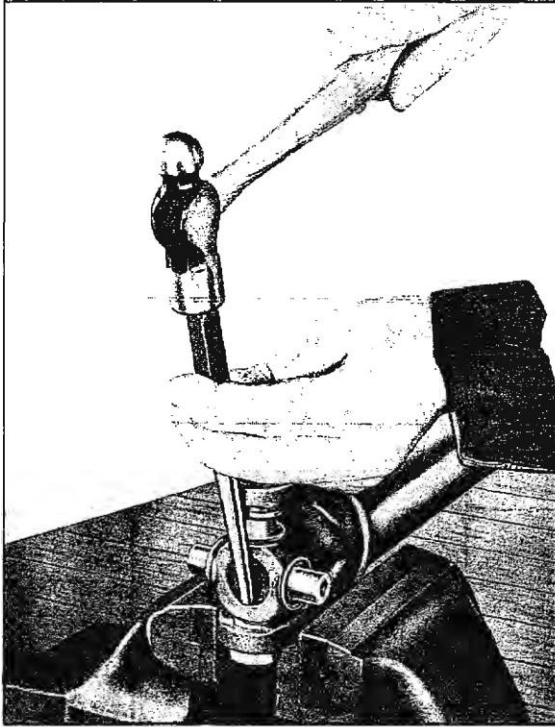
A-6 Removing Bearing From Fixed Yoke Member
